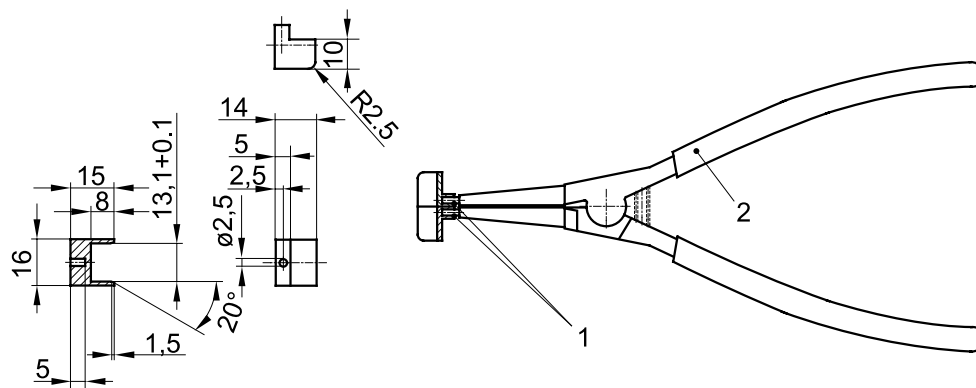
Tool for Detaching the Cable Plugs for the Temperature Sensor from the Cable Harness
